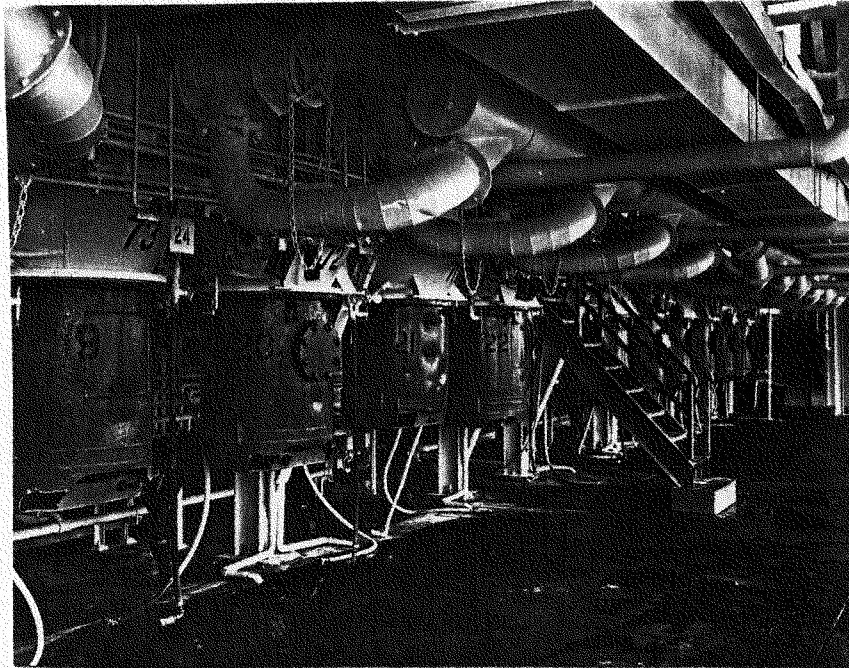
Lower remelt floor. All furnaces are double-shelled with water cooling.
